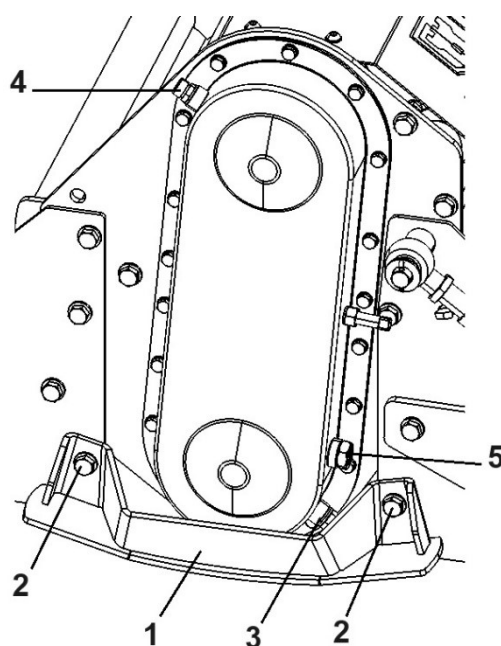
Oil change in the chain transmission: 1 – side skid, 2 – bolts with nuts, 3 - drain plug, 4 - filler plug, 5 - level plug with sight glass
